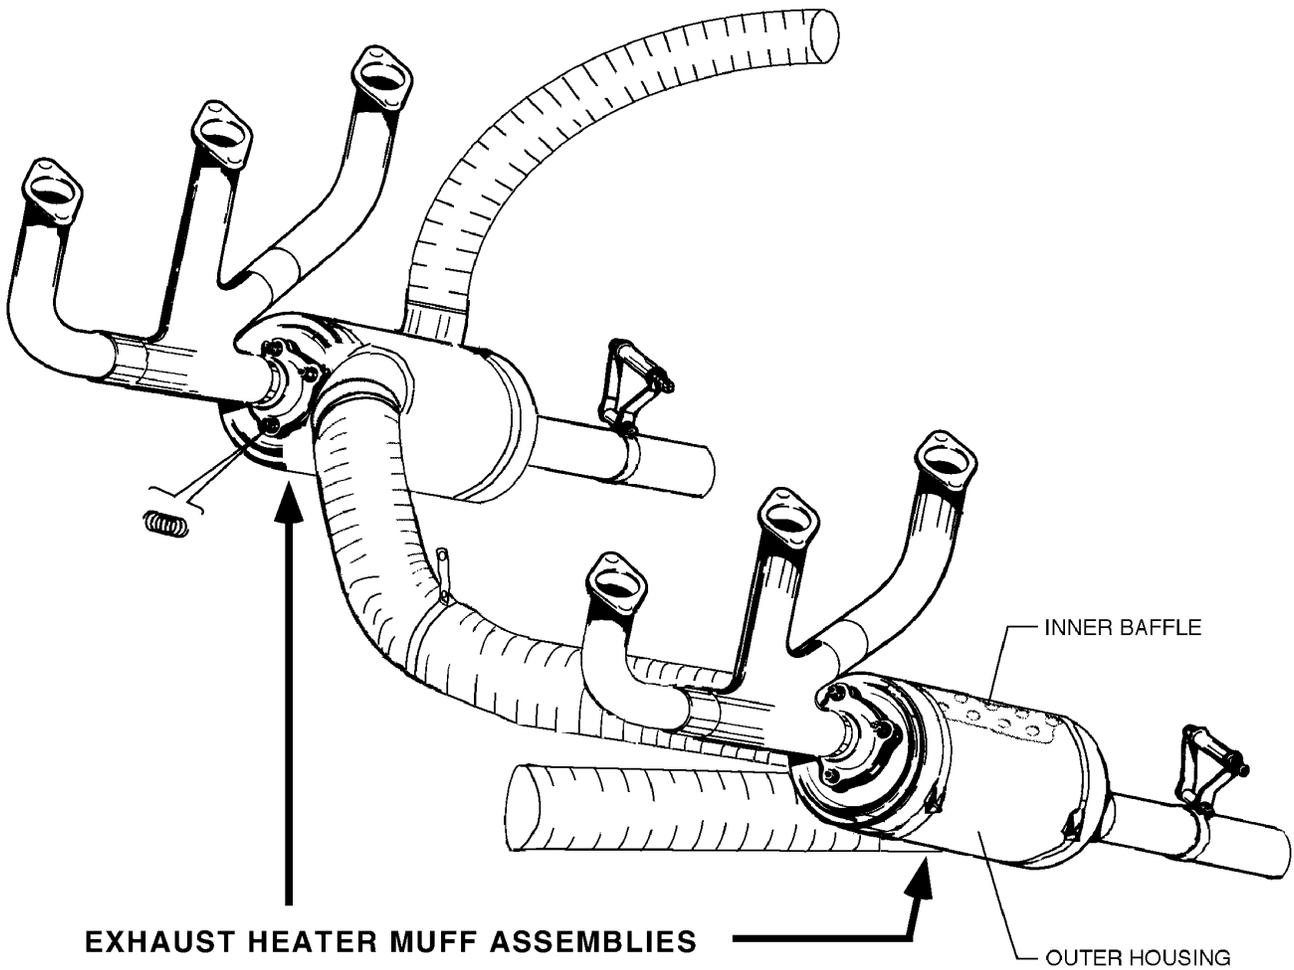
Exhaust System Inspection Points ( Sheet 1 of 2 ) (HP S/N's 3246001 & UP)
